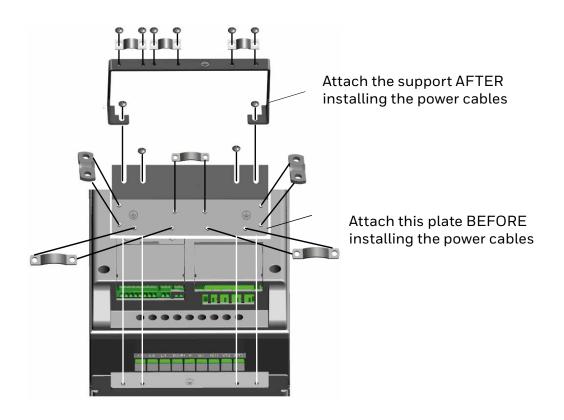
Mount the PE-plate and API cable support, MI4 - MI5
